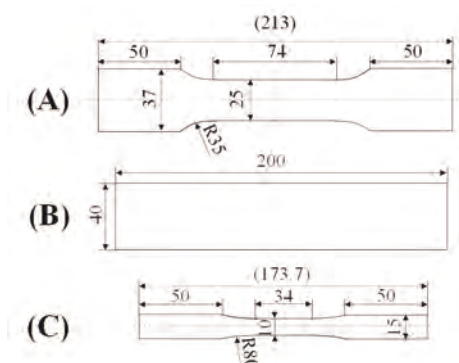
Shape and size of (A): tensile test, (B): bending test and (C): fatigue test specimens (unit: mm)
